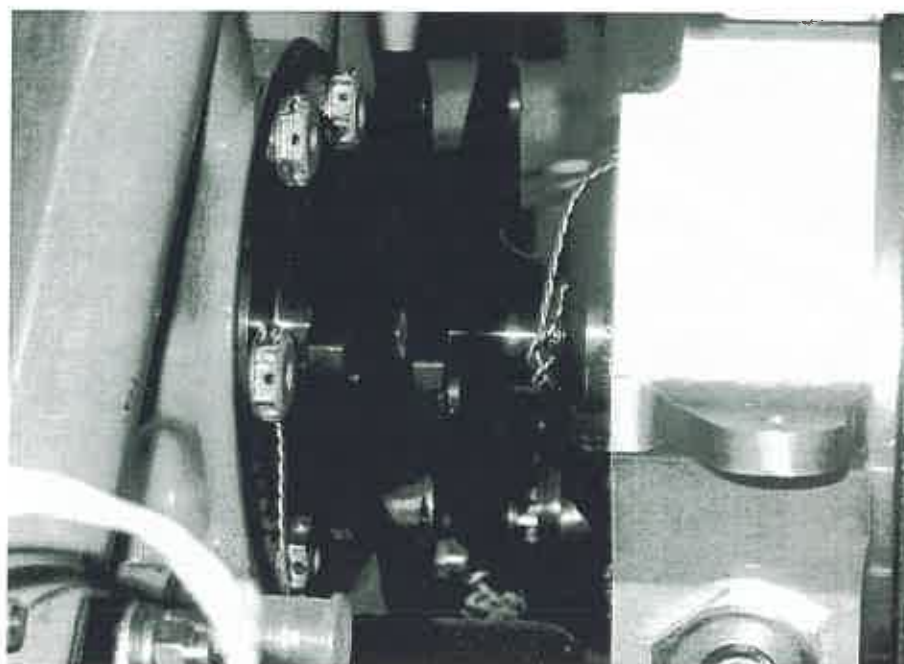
Flange Position for Lateral and Axial Alignment Check
